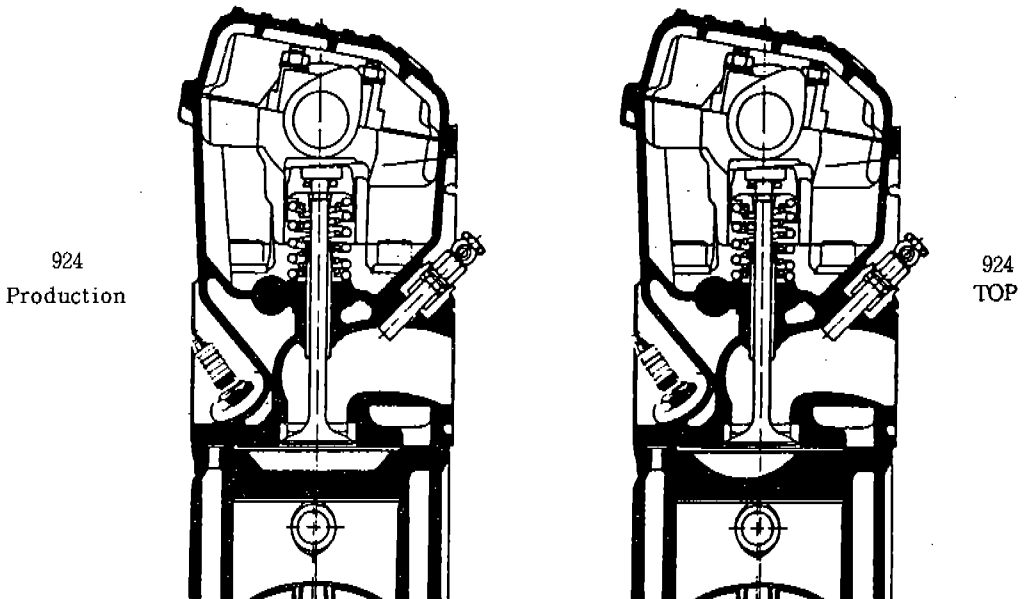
Combustion Chamber Shape. 924 production and 924 TOP engine
